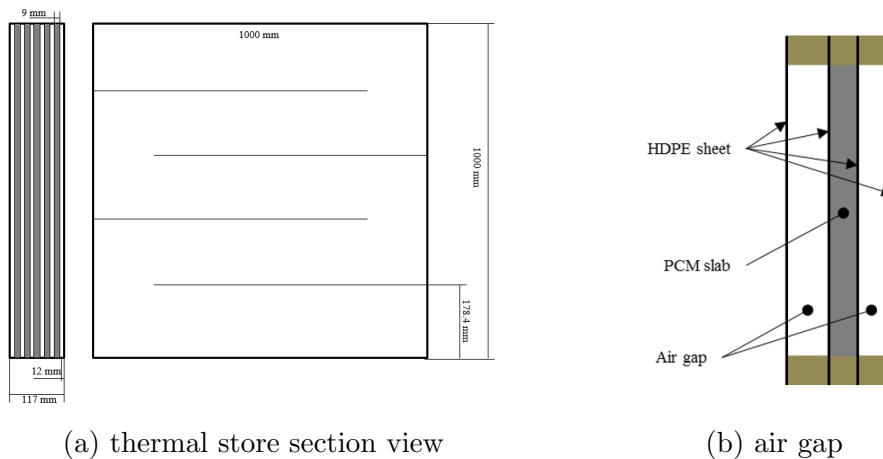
Cross-section drawing of the parallel slab store developed and detailed view of the air gap/slab construction.
